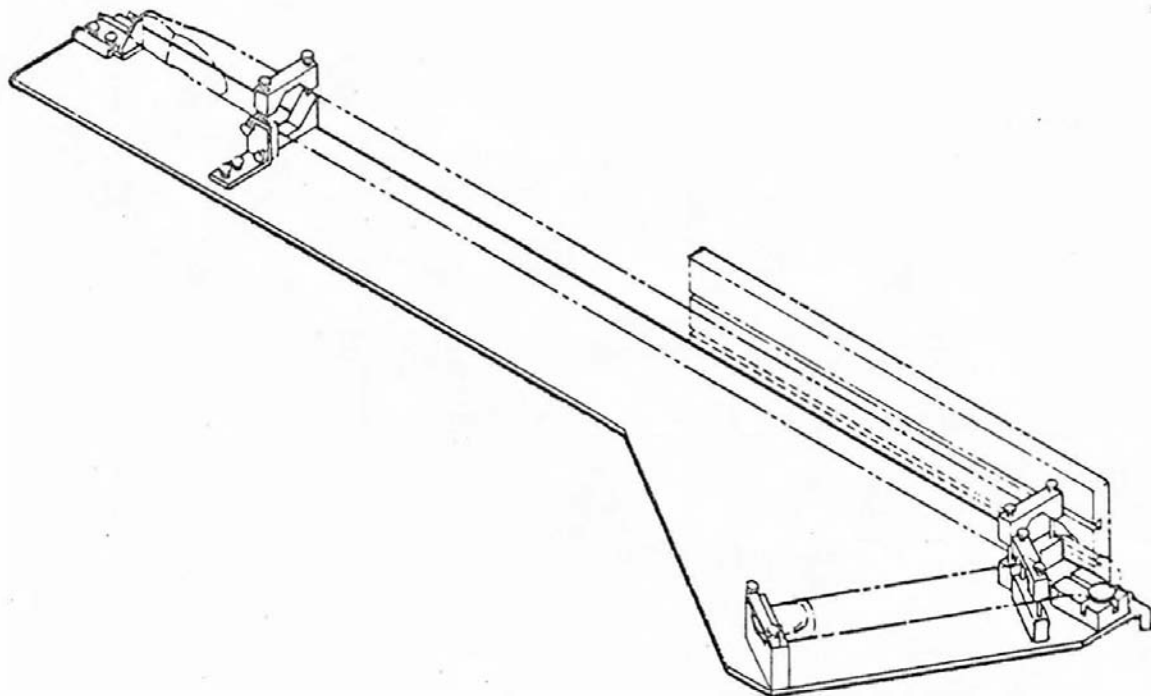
F-1 Engine Actuator Support Assembly Mill Fixture MF-335-32220
